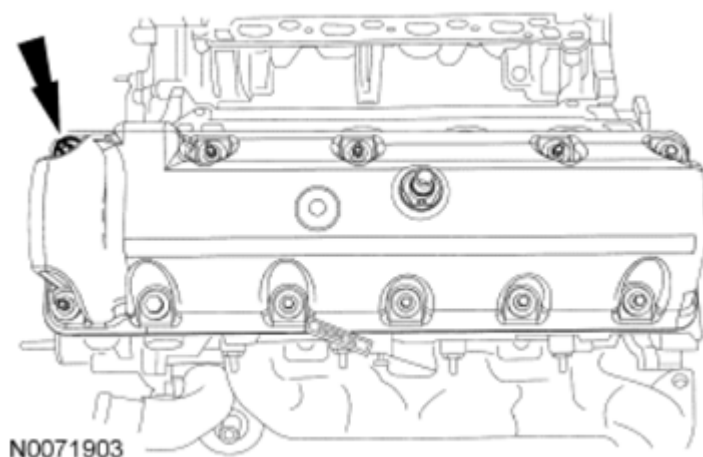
Locating LH Valve Cover Mounting Bolts And Studs
